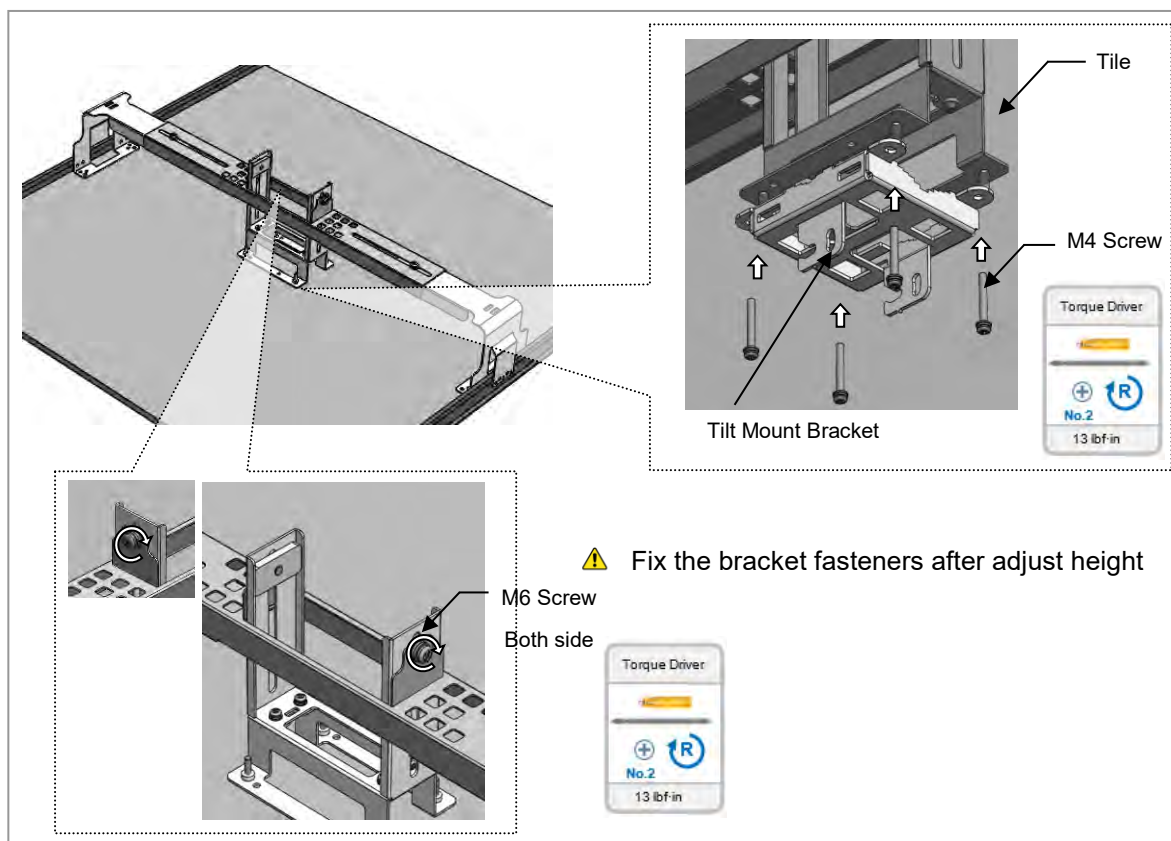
Fixing Tilted Ceiling Mount Bracket Assembly
